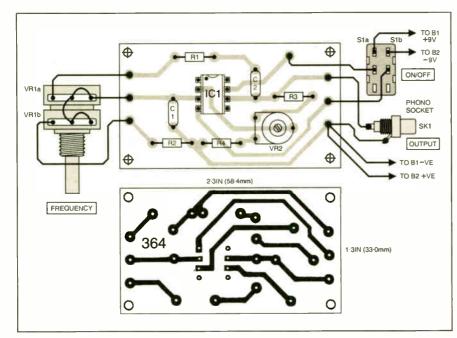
Low Frequency Oscillator printed circuit board component layout, interwiring to off-board components and full-size underside copper foil master pattern.
